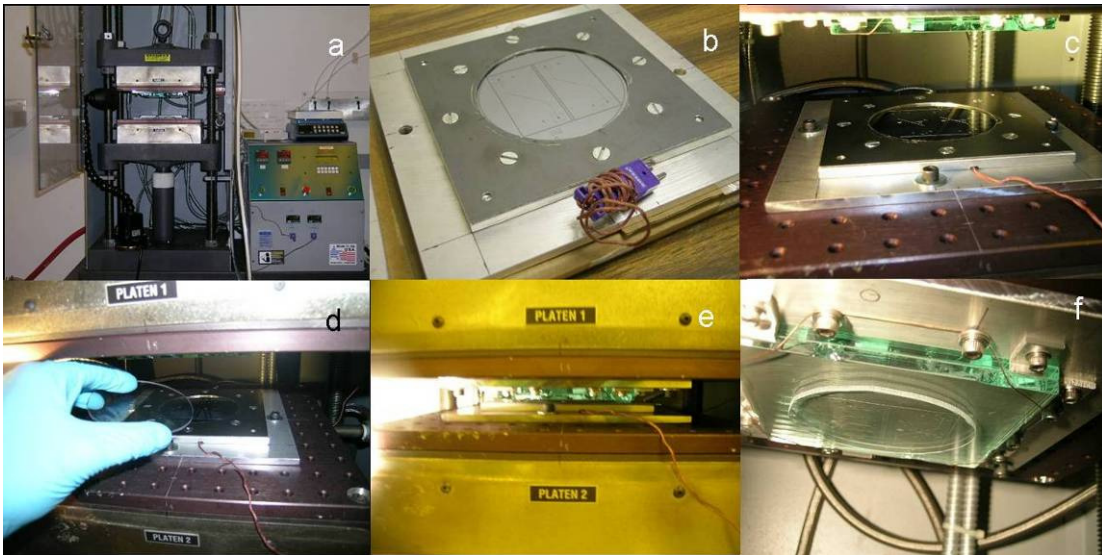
SU-8 imprinting in pictures. (a) The Carver hot press, (b) Lower embossing fixture with master template installed, (c) Upper and lower embossing fixture installed in press, (d) Inserting blank polycarbonate wafer, (e) Imprinting the wafer, and (f) Press opening and mold removal.
